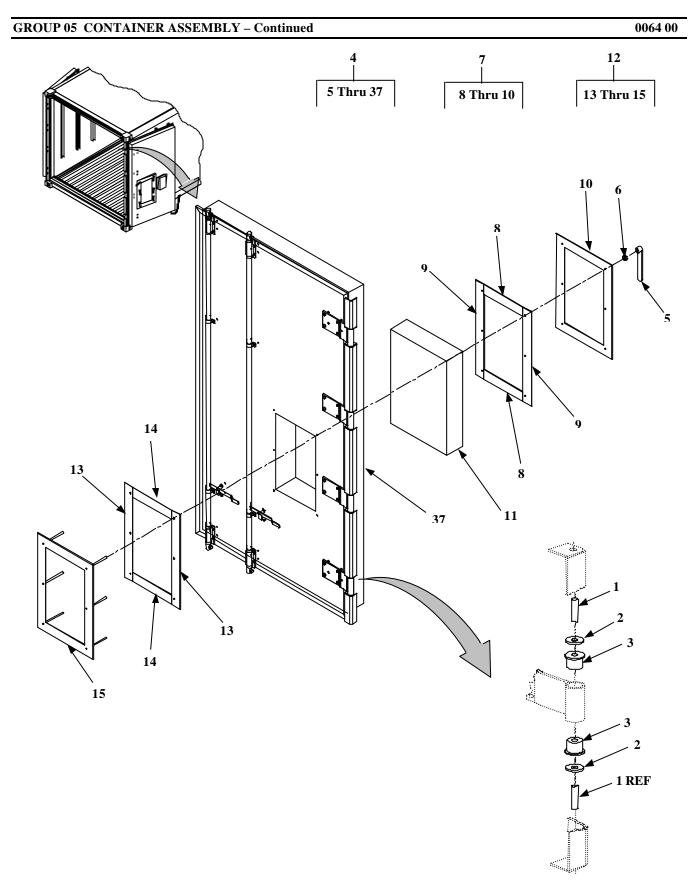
Right Hand Door Assembly (Sheet 1 of 4)
